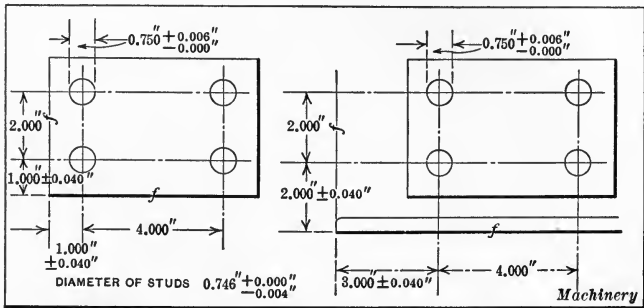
Another Method of Dimensioning with Tolerance Part shown in Fig. 24
